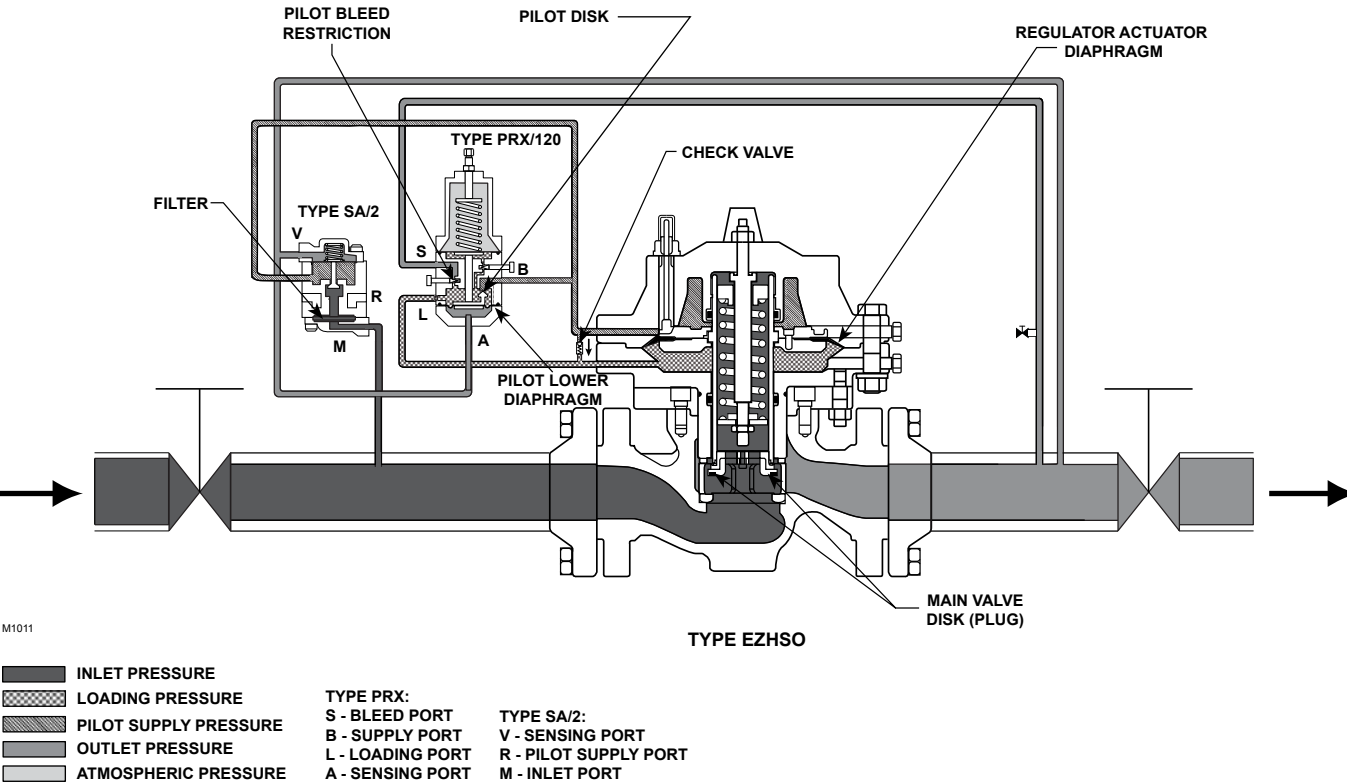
Type EZHSO (Spring-to-Open Version) Operational Schematic
